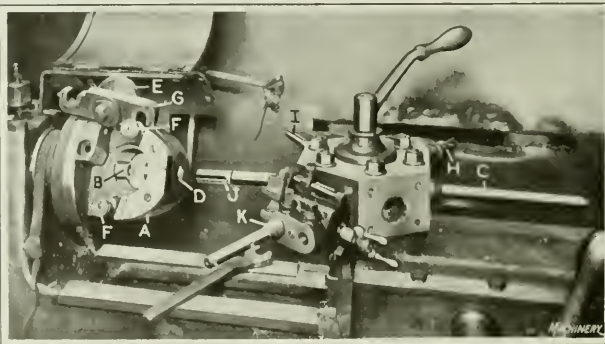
Turret Lathes equipped for drilling, boring and reaming the Wrist-pin Holes and cutting the Locking Ring Grooves
